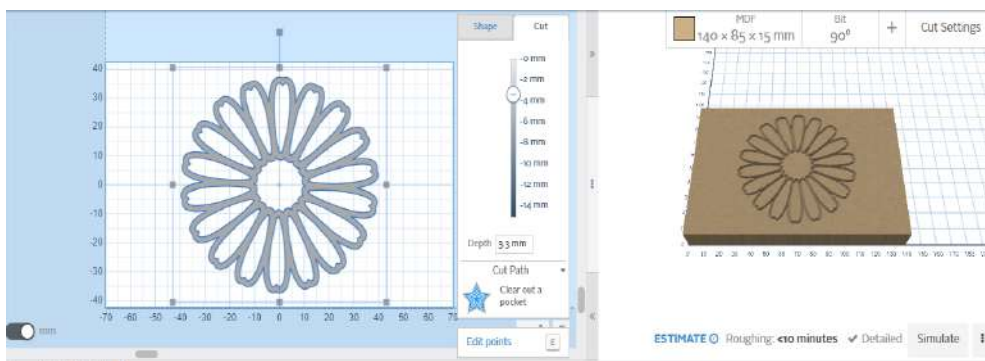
3D model of a flower to be printed on wood with CNC machine built on easel software
